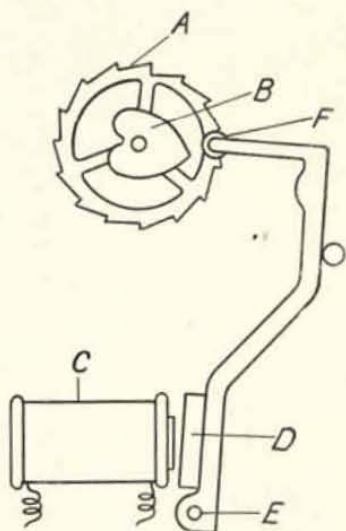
HEART-SHAPED CAM SYNCHRONIZER
